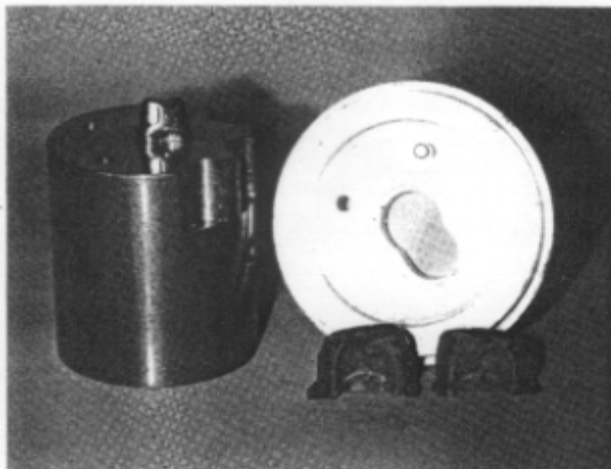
Disassembled view of master die, mold relater, and design No. 2 coping mold.
